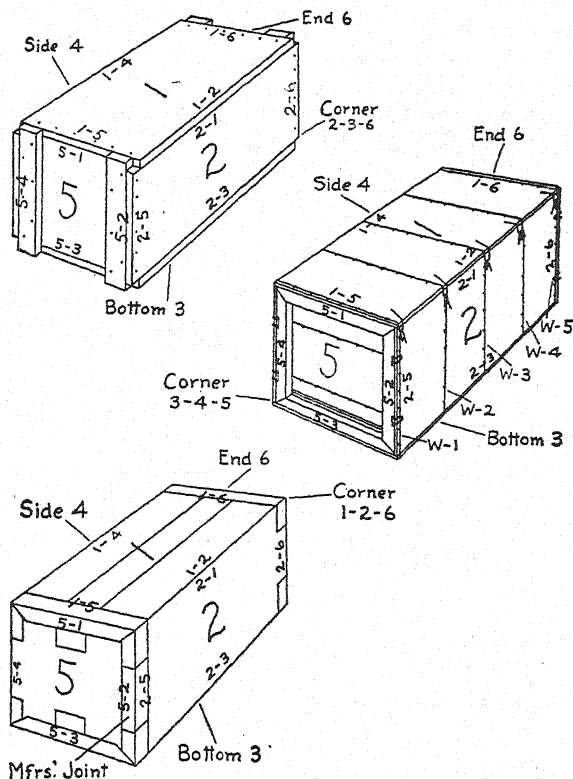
Identification of the Faces, Edges, and Corners of Test Specimen.
